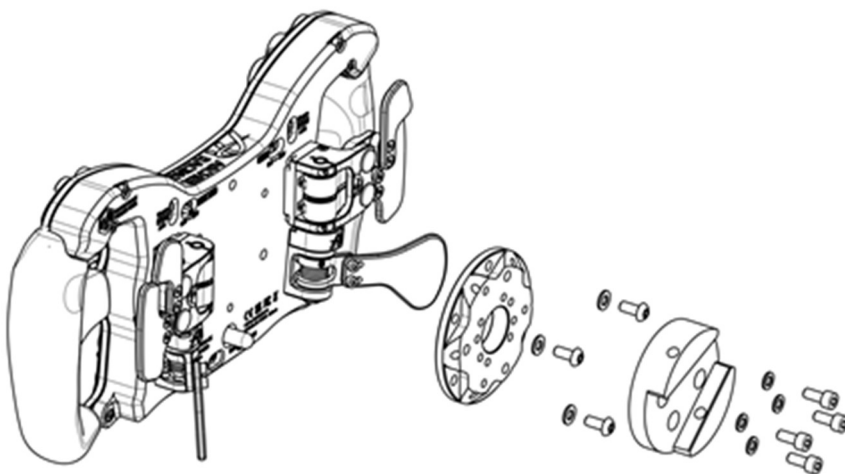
Mounting the SC2 SQR WHEEL SIDE – Ascher Racing SQR Adapter
